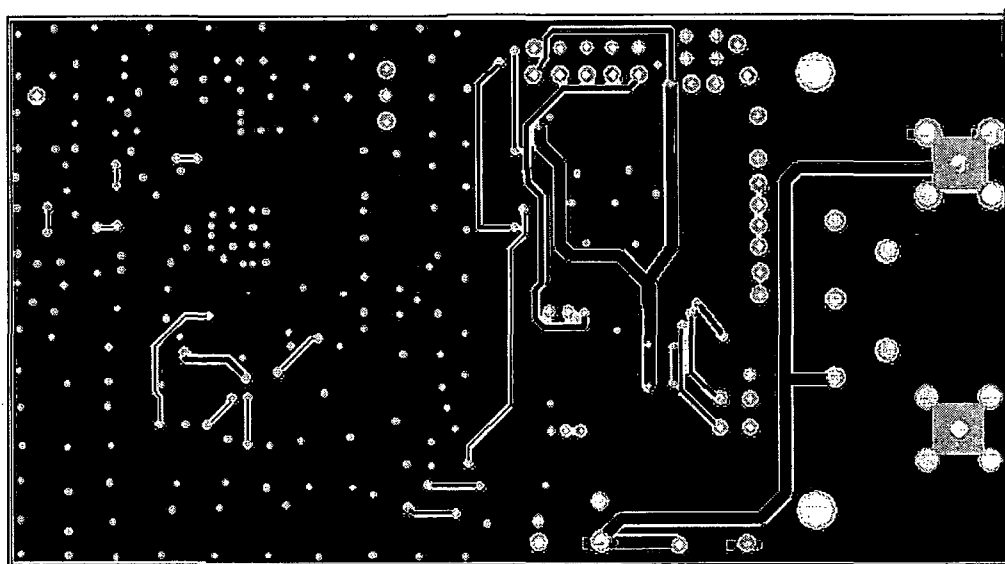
Pre-production PCB Layout (Bottom Layer)
